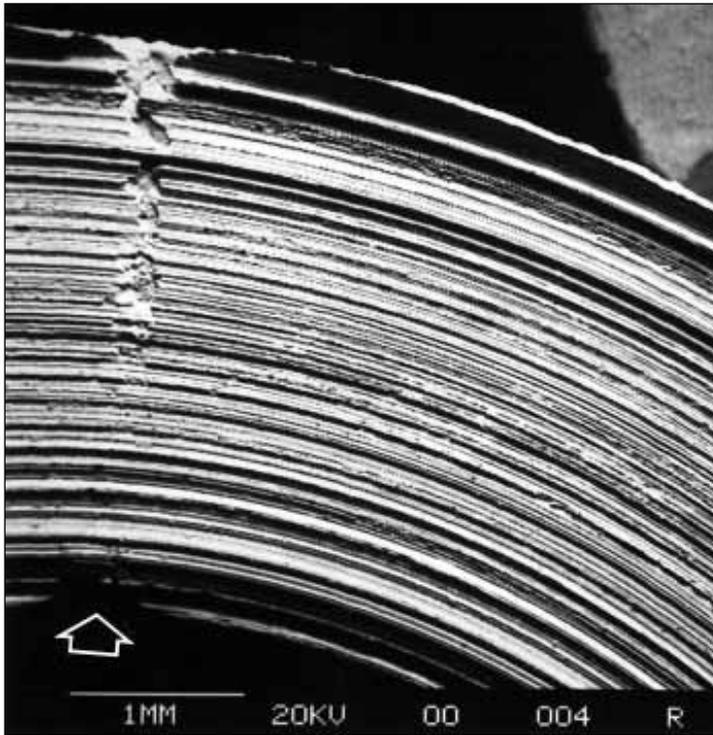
Scanning electron micrograph showing the remnant of the radial lubrication groove on the thrust surface of the fuel pump bush, right-hand engine.
